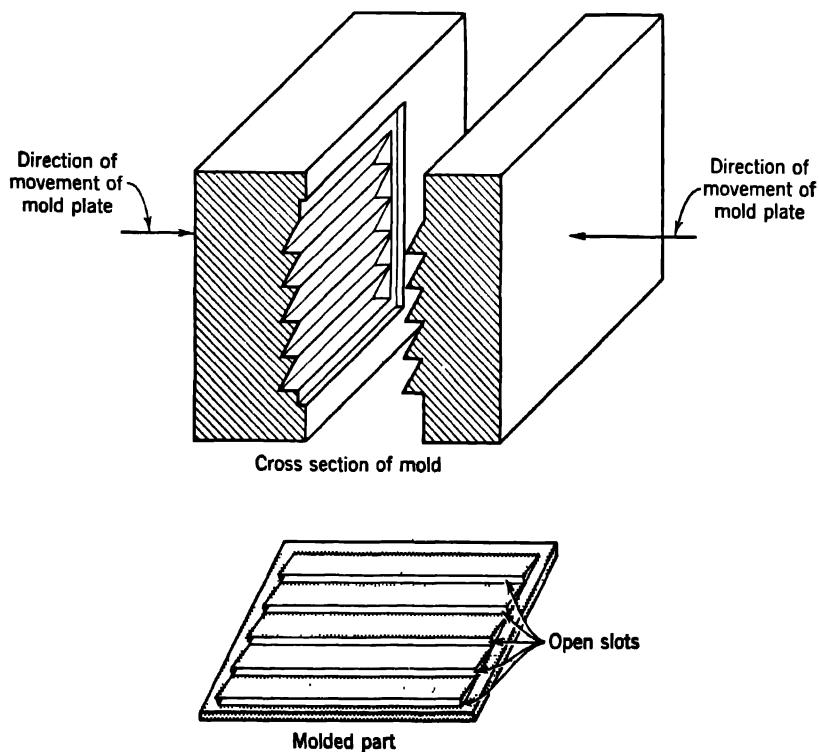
Step-back mold for producing side holes in louvred section.
